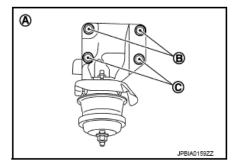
Engine Mounting Bracket Bolts Tightening Sequence Courtesy of NISSAN MOTOR CO., U.S.A.
